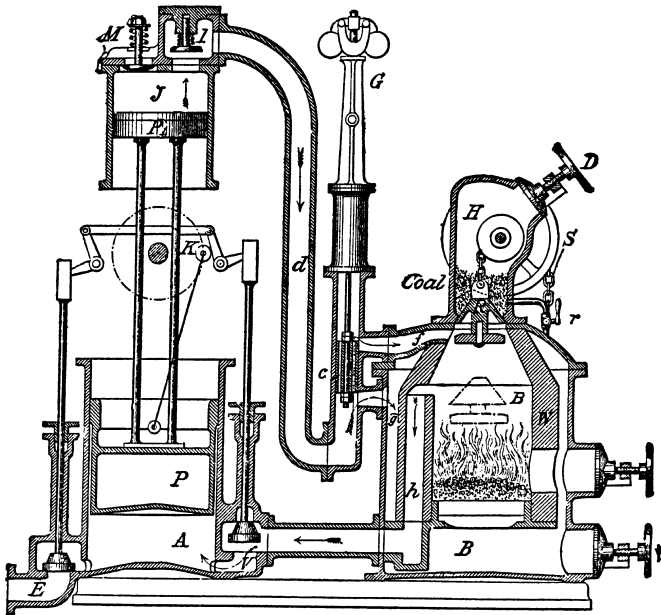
A Bucket 'furnace gas engine' with separate cylinder assembly and furnace. This engine achieved considerable popularity between 1875 and 1885. After Donkin (1911)
